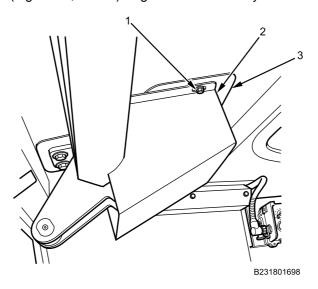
Left Side Shroud Cover Installed on Roof-Mounted Bracket.
